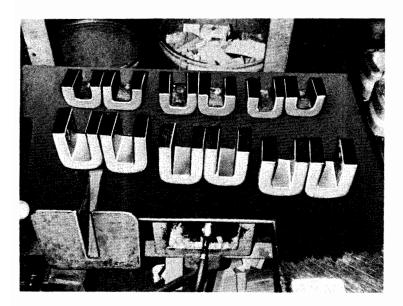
Cores laid out for assembly—bottom yoke insulation in place
